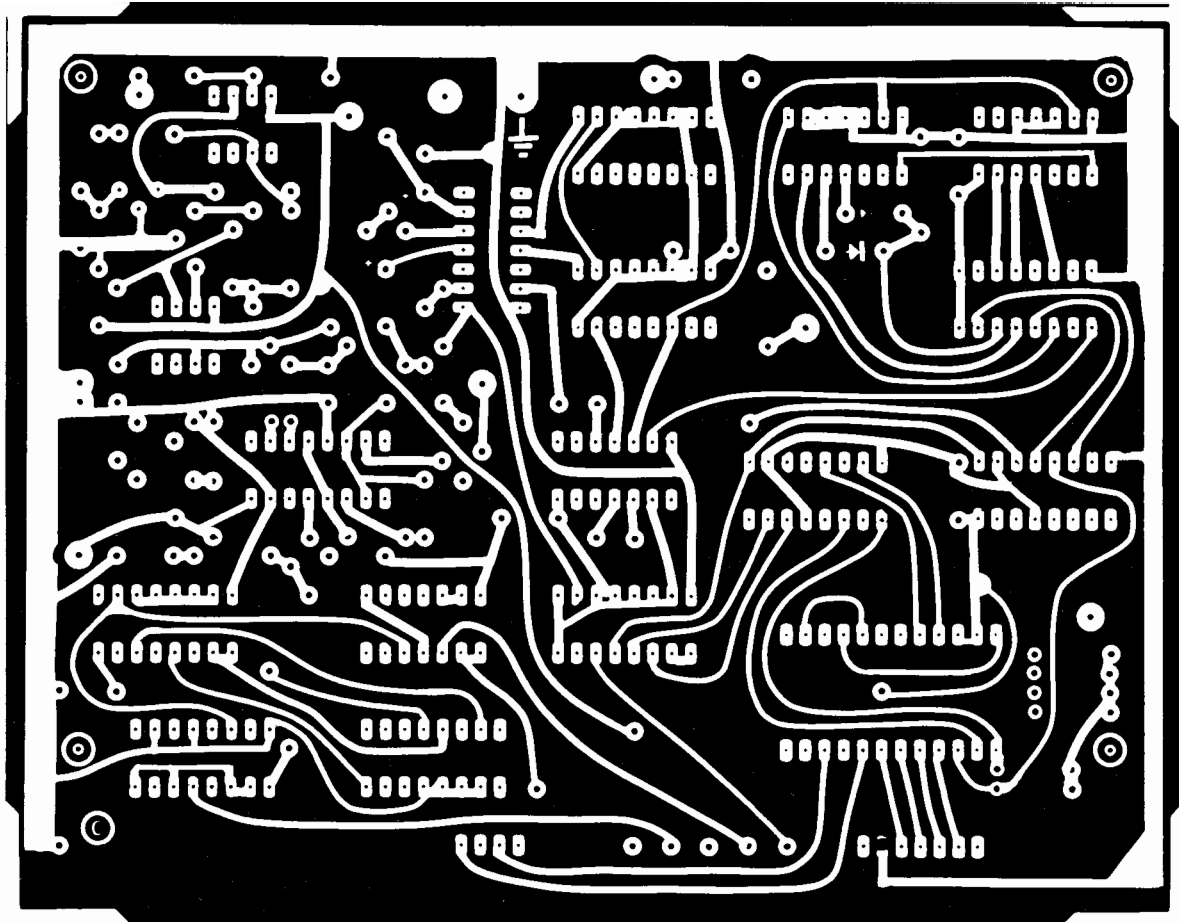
Actual-size etching and drilling guides for the double-sided main printed circuit board.
